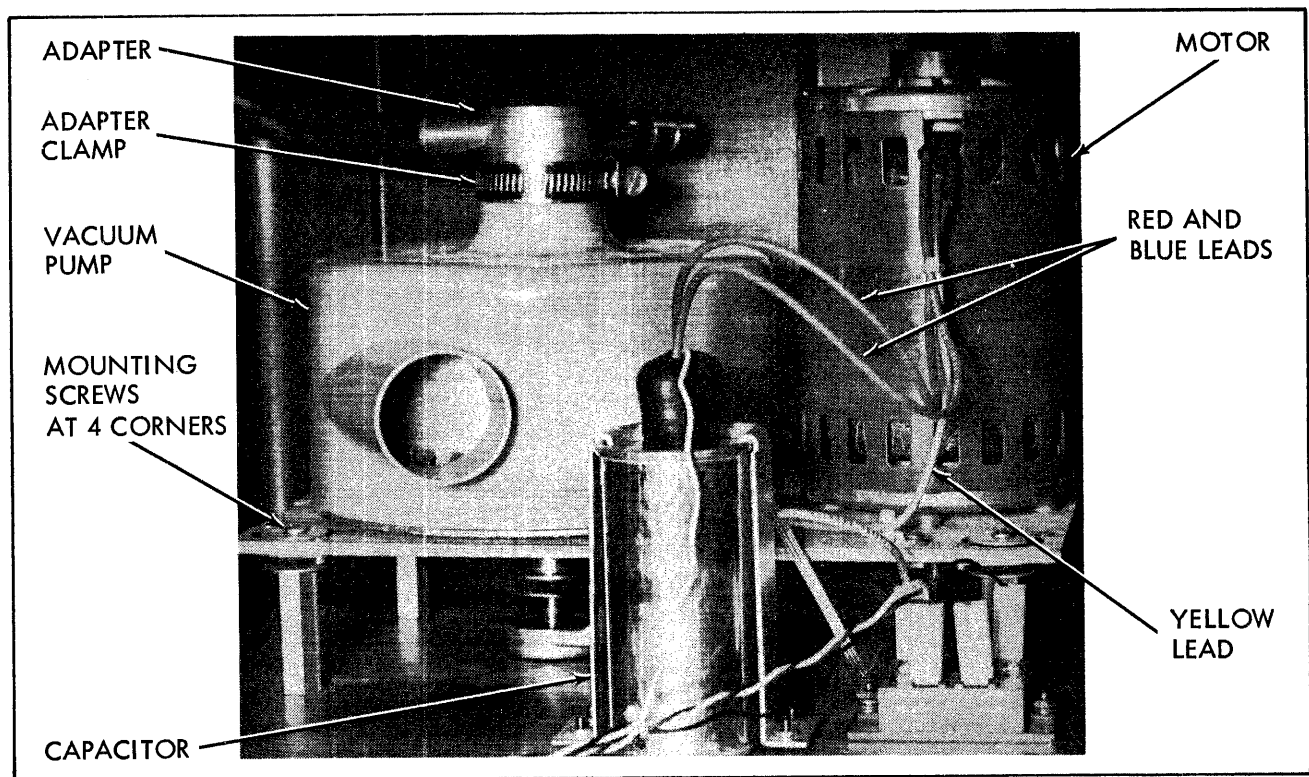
Bottom Vacuum Pump Assembly Removal
